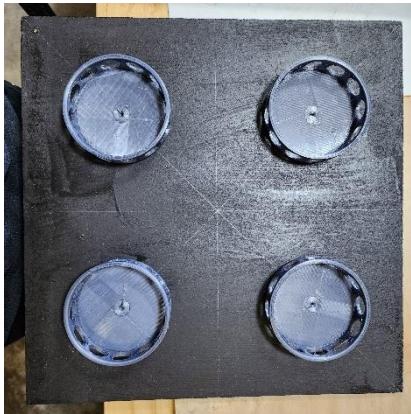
Screwed on the holding brackets for the nutrient glass bottles.
